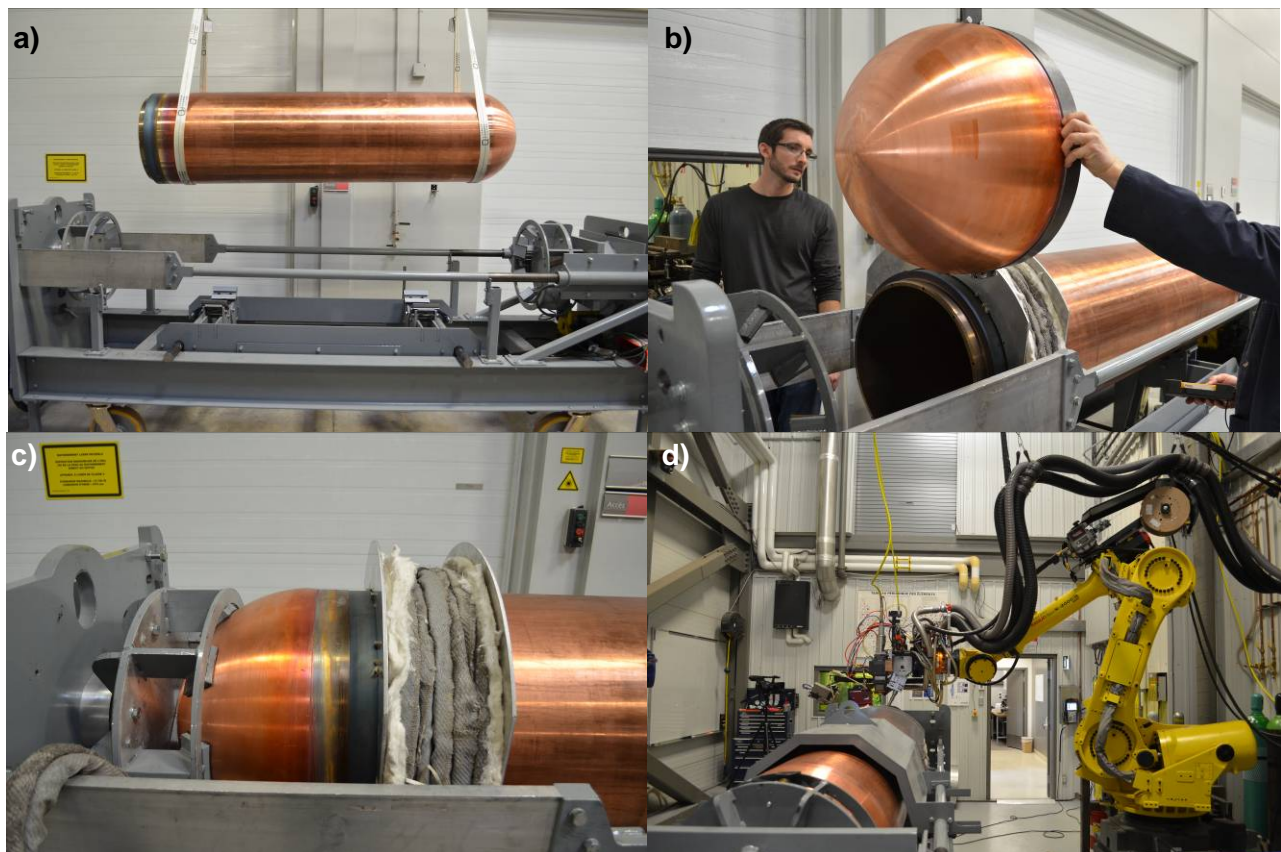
Mark II Used Fuel Container Welding (a) Loading container into scissor lift (b) Loading upper hemi-head into position (c) End-clamping of container and positioning of non-contact induction heater (d) Welding with splatter guards in place
